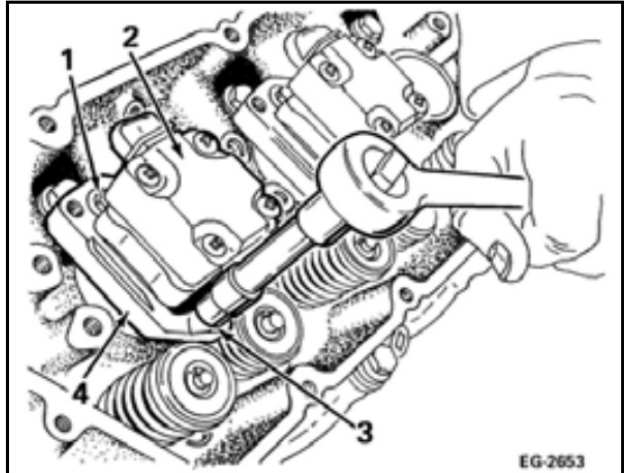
Removing the Mounting Bolt for the Fuel Injector Hold Down Clamp
